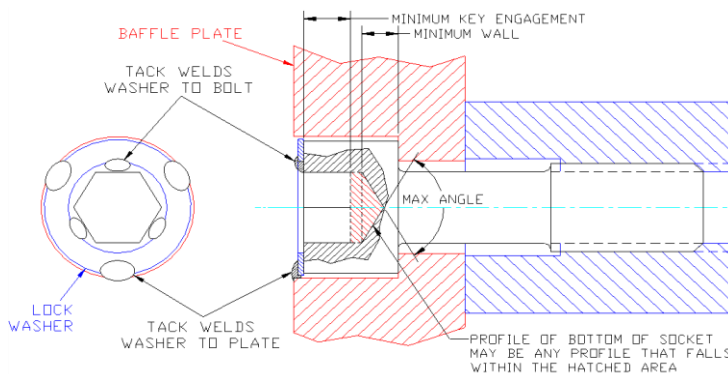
Drawing of an installed inner socket bold with lock washer and weld pins
